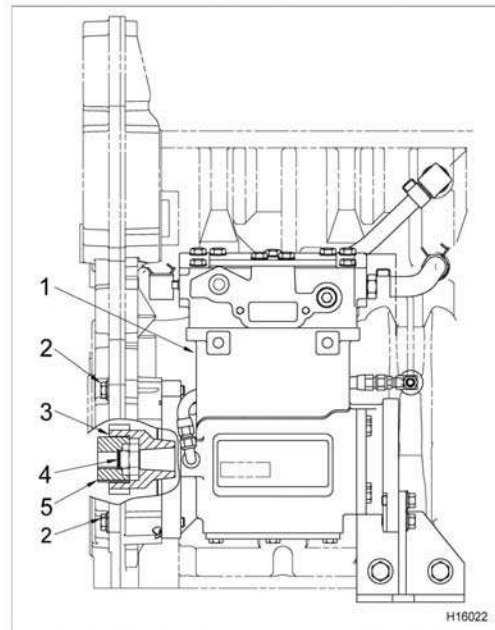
PTO spline adapter installed onto air compressor drive gear.
